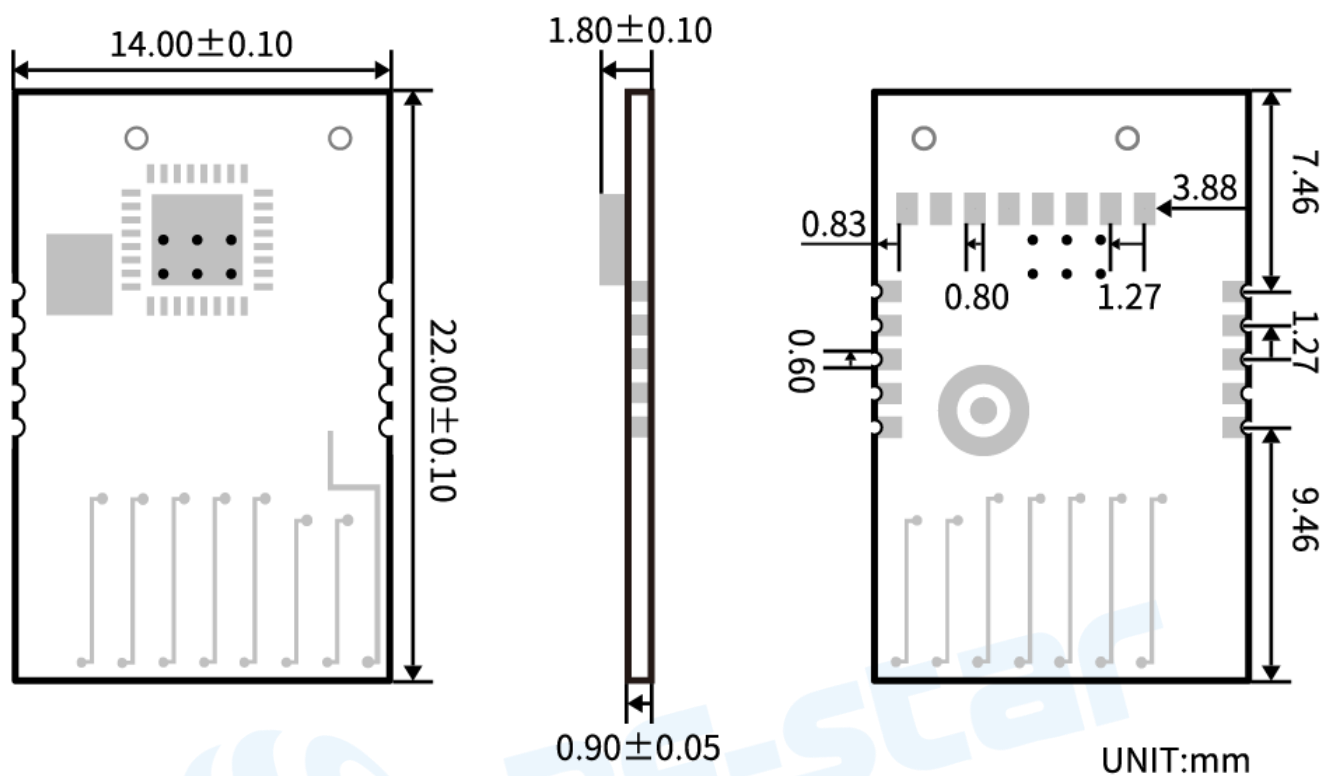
Recommended PCB Footprint of RF-SM-1044B1 (mm)
